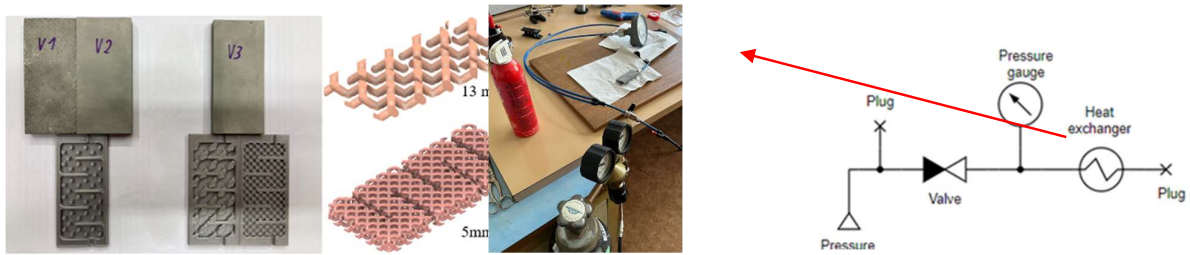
Overview of heat exchanger prototypes with inner structures details and leak test setup.
